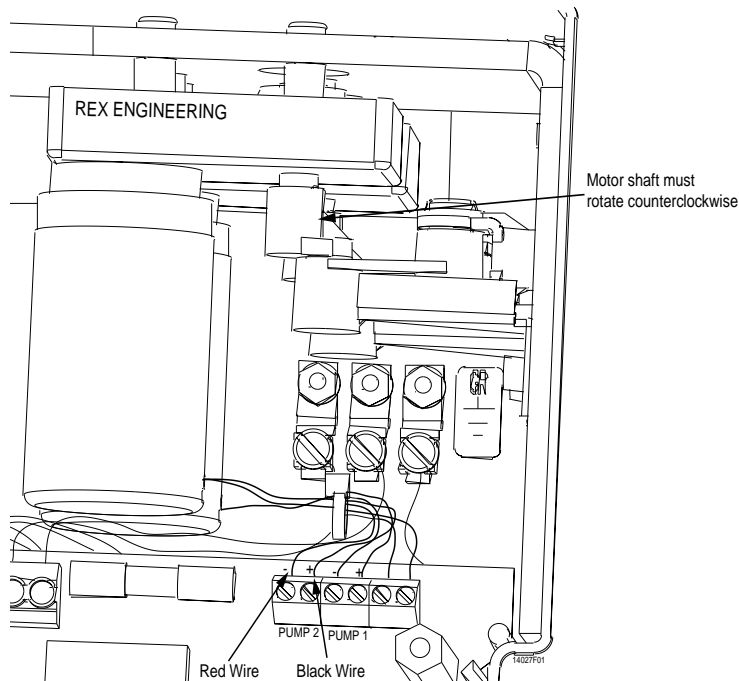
Cutaway drawing showing Pump 1 and Pump 2 wires and terminals.
